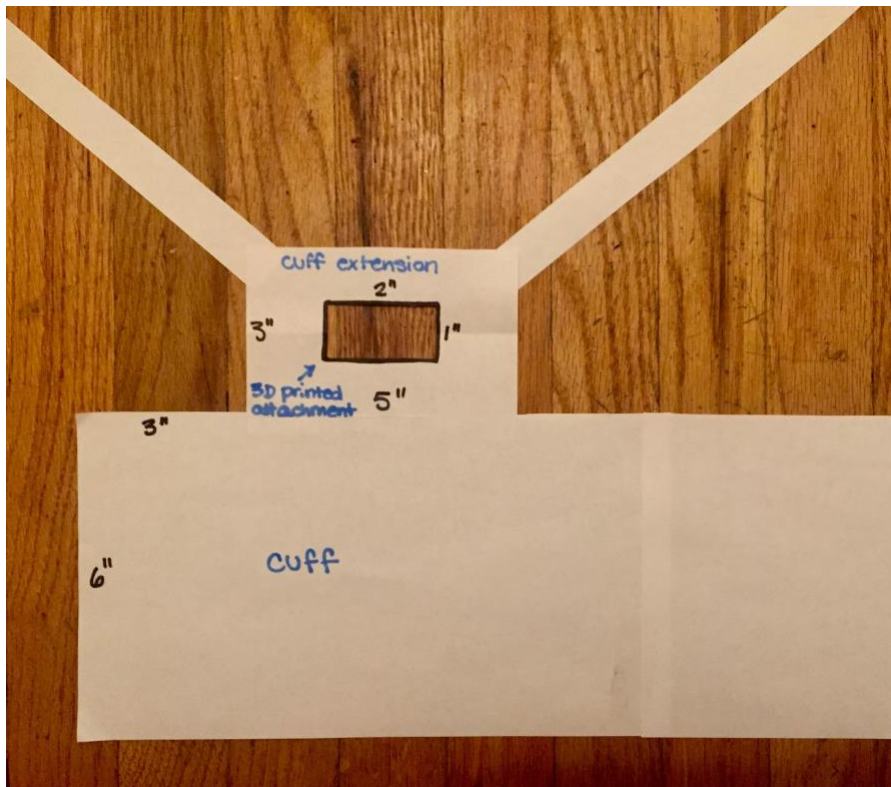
Dimensioned Model—Dimensioned Paper Model of Device
